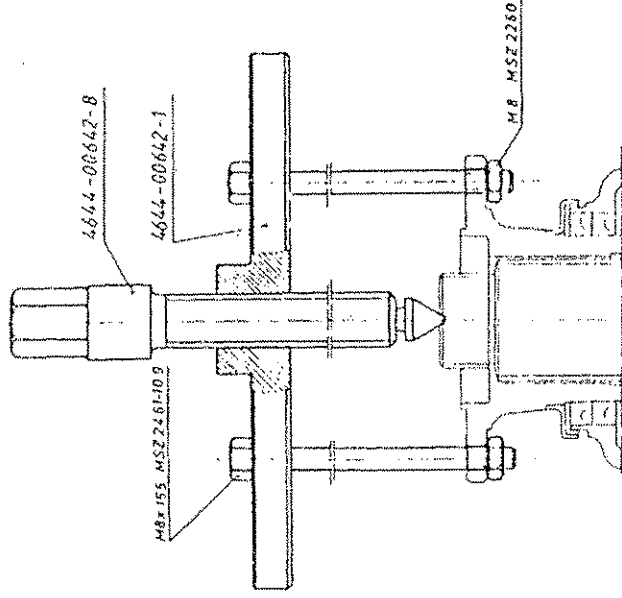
ASSEMBLING THE SELF-LOCK NUT
